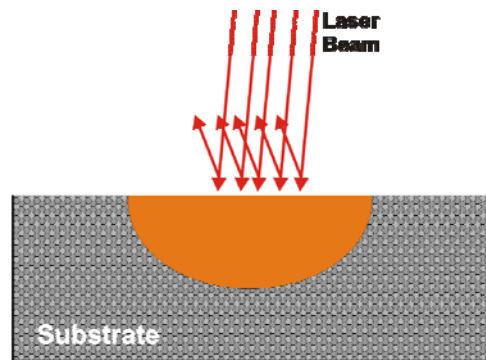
Diagram of the laser material interaction phenomena of typical welding mode
